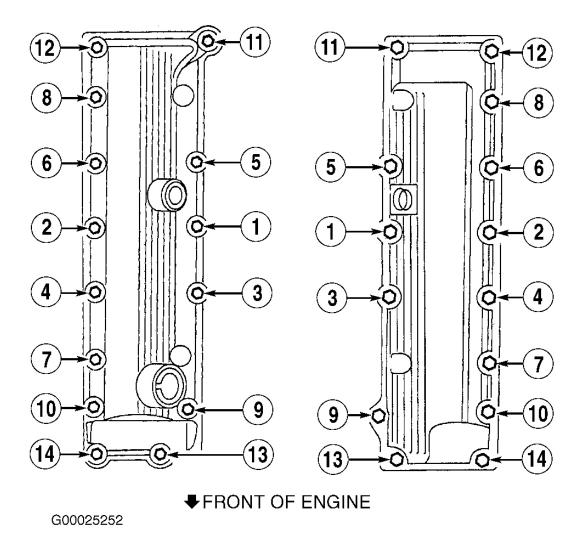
Valve Cover Bolt Tightening Sequence Courtesy of FORD MOTOR CO.
